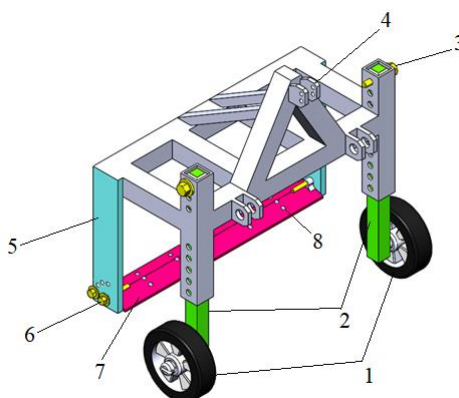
Construction scheme of the universal root crop harvester 1-wheels; 2-moving wheel support; 3-wheel support fastening bolt; 4-root crop harvester suspension; 5-column holding the main ploughshare; 6-bolts securing the main plow; 7-main plow; 8-Place for installing additional coulters.
